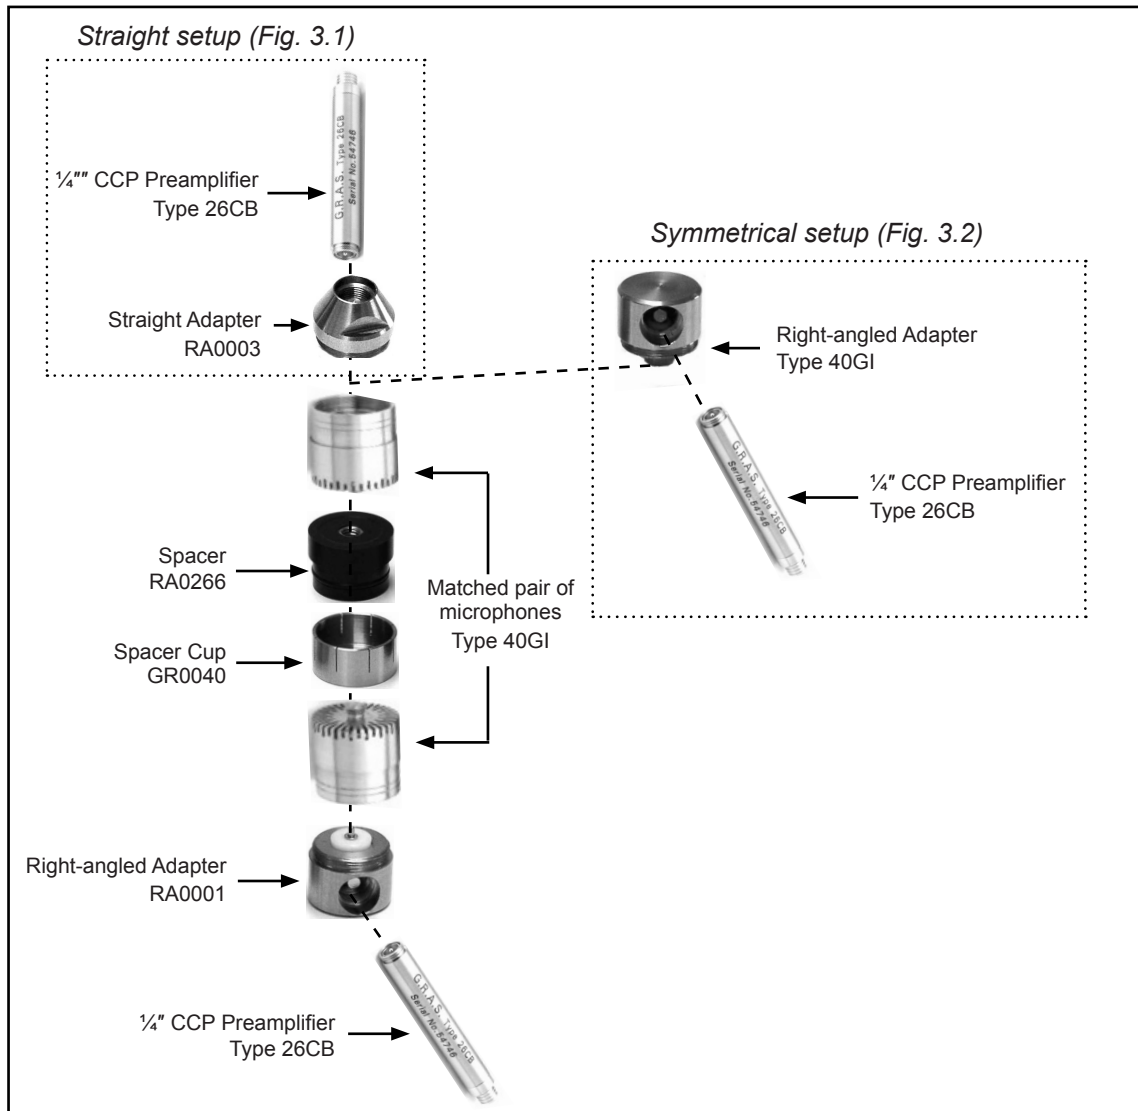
Exploded view of probe assembly for both straight and symmetrical setup
